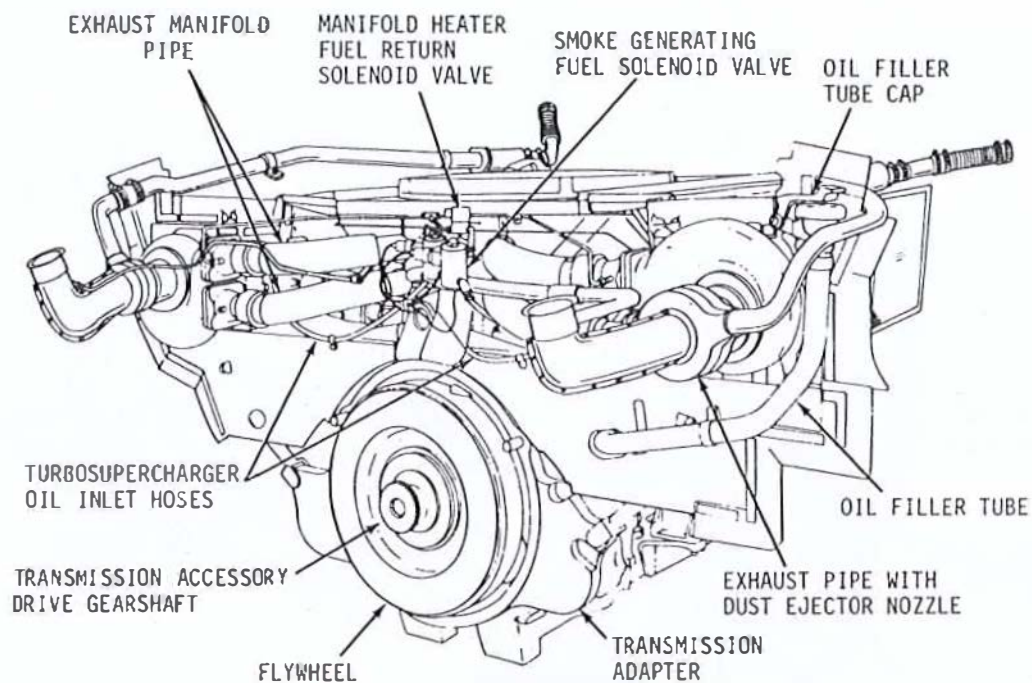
AVDS-1790-2CA engine assembly - right front view.
